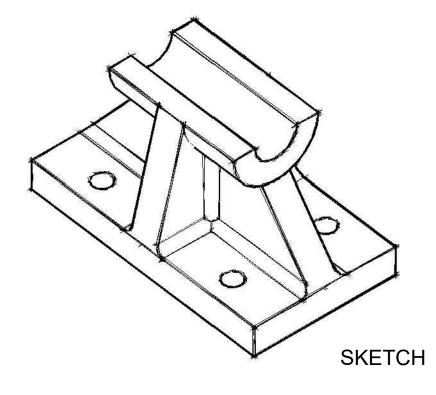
shows a pictorial drawing of a cast iron support station. The right End elevation, Plan, and an outline of the sectional Front elevation are given below.
